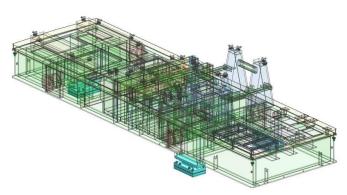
Top view of wide flange beam base with lube oil console under the gear
